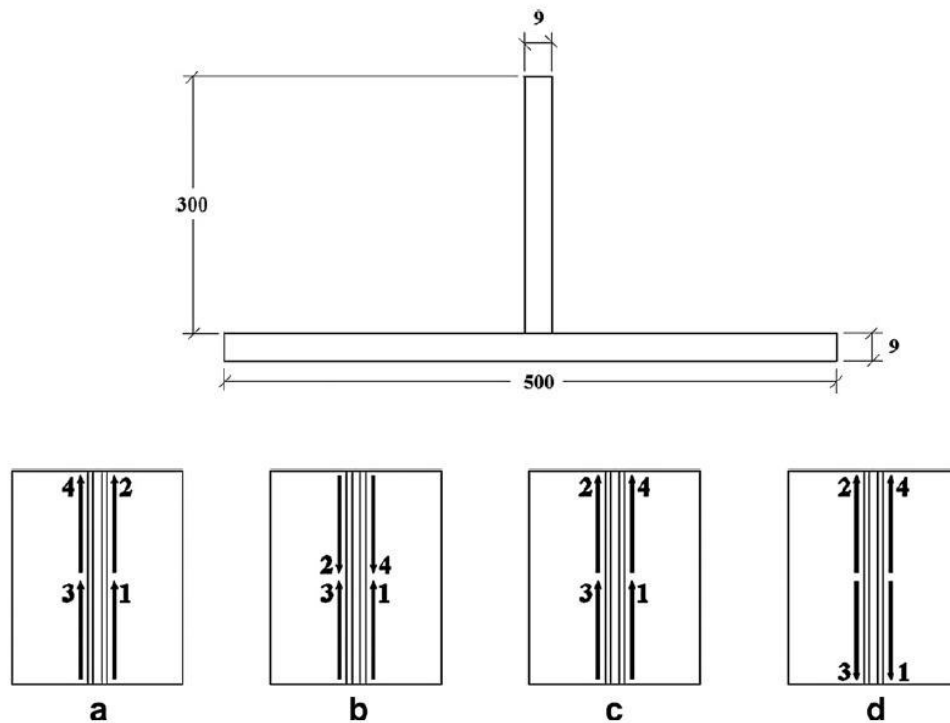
T-Joint Weld Structure and Weld Sequences [62]
